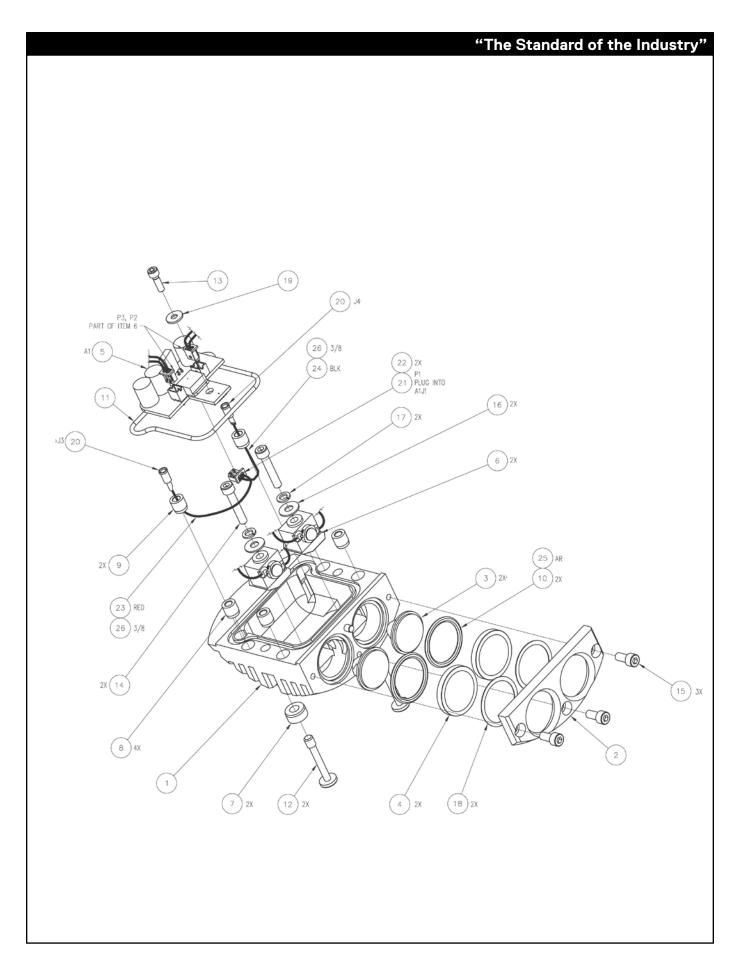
Lighthead Module Assembly, LED, OZII, CZ303
